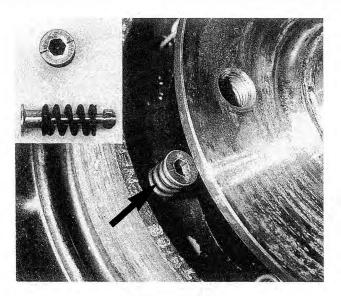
Rear parking brake shoe retaining spring and spring retainer (arrow). Inset shows retainer assembly.
